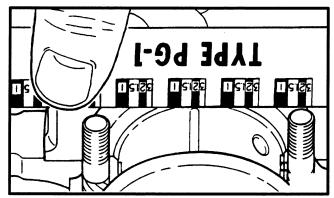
MEASURE THE PLASTIGAGE® ON A BEARING JOURNAL
